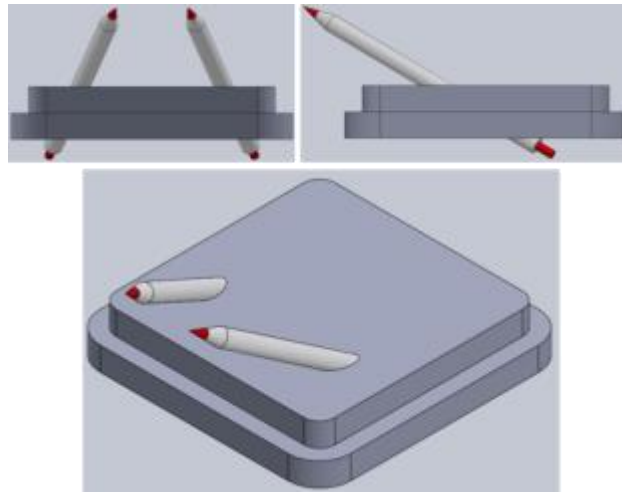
CAD drawings of spark actuator: front view (top right), side view (top left), isometric view (bottom).
